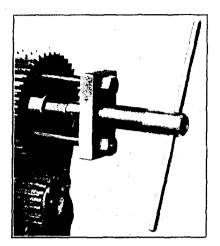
Removing Camshaft Sprocket on V-63 with Puller 85799
